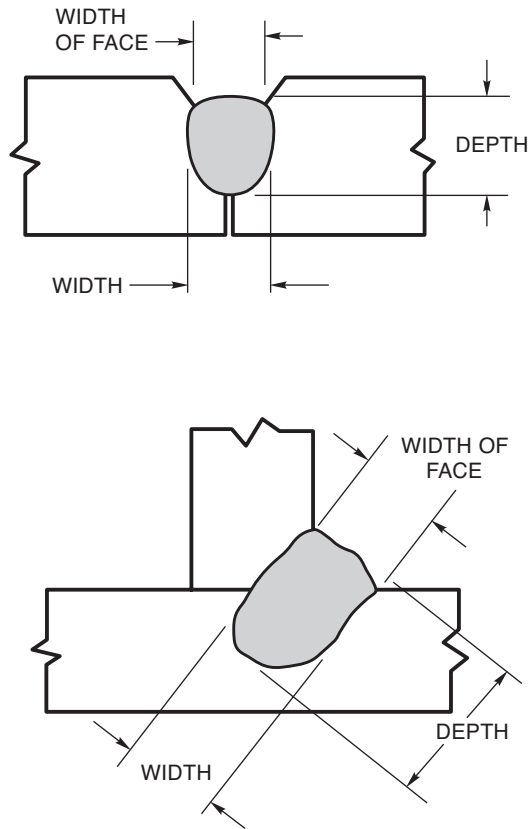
Weld Bead in Which Depth and Width Exceed the Width of the Weld Face (see 6.7.6)
